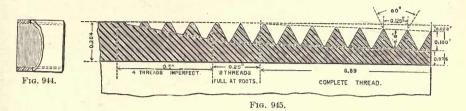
is the longitudinal section of tapering tube-end with the screw thread as actually formed, and considered standard by the late Robert Briggs, C. E., in his "Treatise on Warming Buildings by Steam." It is shown in the figure double full size for a nominal $2\frac{1}{2}$ " tube.
